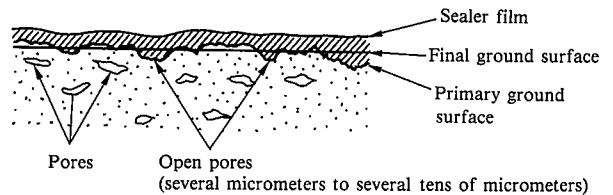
Cross-sectional schematic of sealer film and finish ground surface
